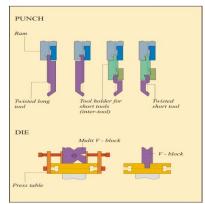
Adjustable tool holders on the ram of the press and bottom tools - dies on the press table
